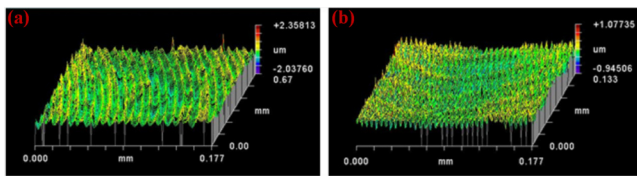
Machined surface¹⁰⁴ (a) CMM (b) UVAMM.
